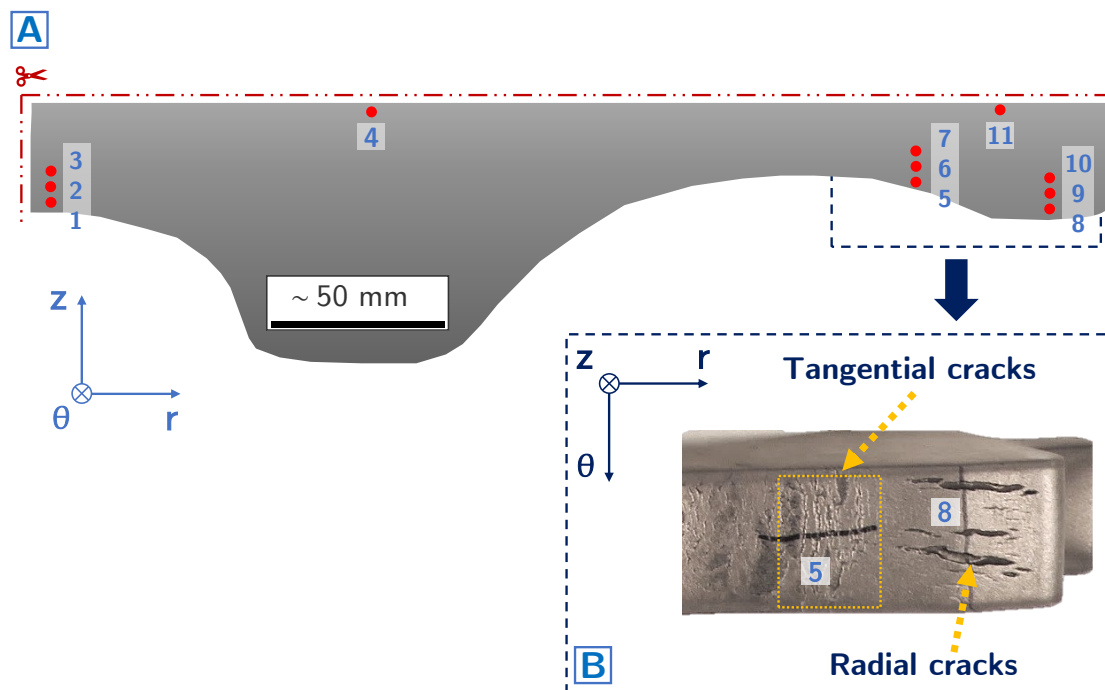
(A) Schematic of the full-scale Udimet 720 workpiece following hot die forging. The points (1 – 11) indicate the location of the tracer points on the FEM model of Chapter 5. (B) Section of the full-scale Udimet 720 forged workpiece showing surface cracks above tracer point 5 (tangential cracks) and tracer point 8 (radial cracks).
